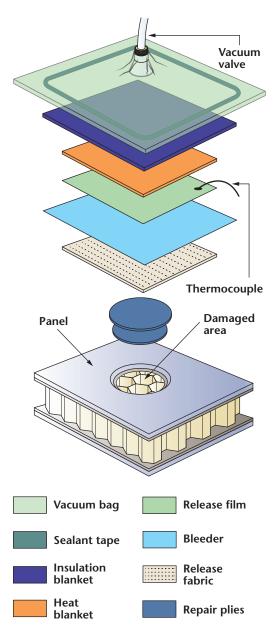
A typical bagging operation with a heat blanket. Make sure there is a release film (vacuum bagging film works great) over the bleeder. The thermocouple goes on top of the release film. If the thermocouple is in direct contact with the bleeder, resin will stick to the thermocouple, possibly ruining the thermocouple.
